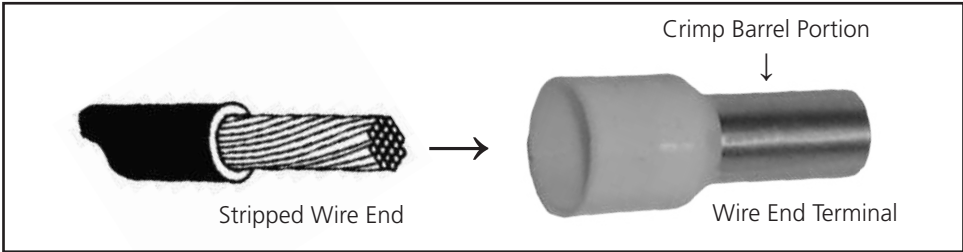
Stripped Wire End Terminal on AC Wiring
